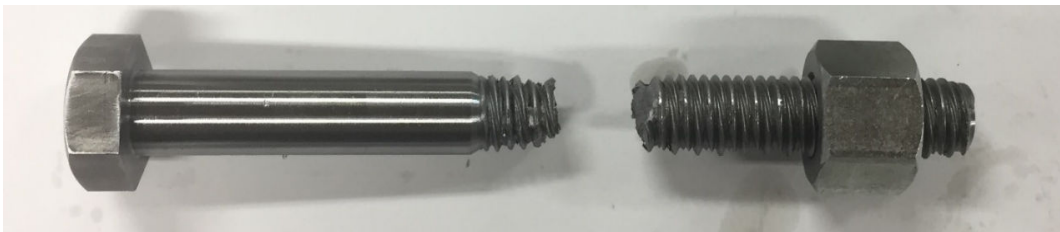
Fractured bolt specimens of 3-1 DTB-IIB in tensile tests
